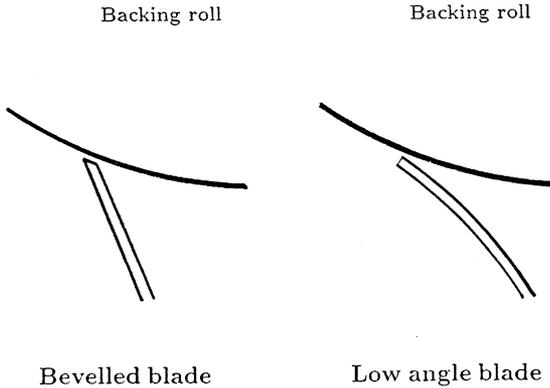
The geometry in bevelled blade and low angle blade coating.
